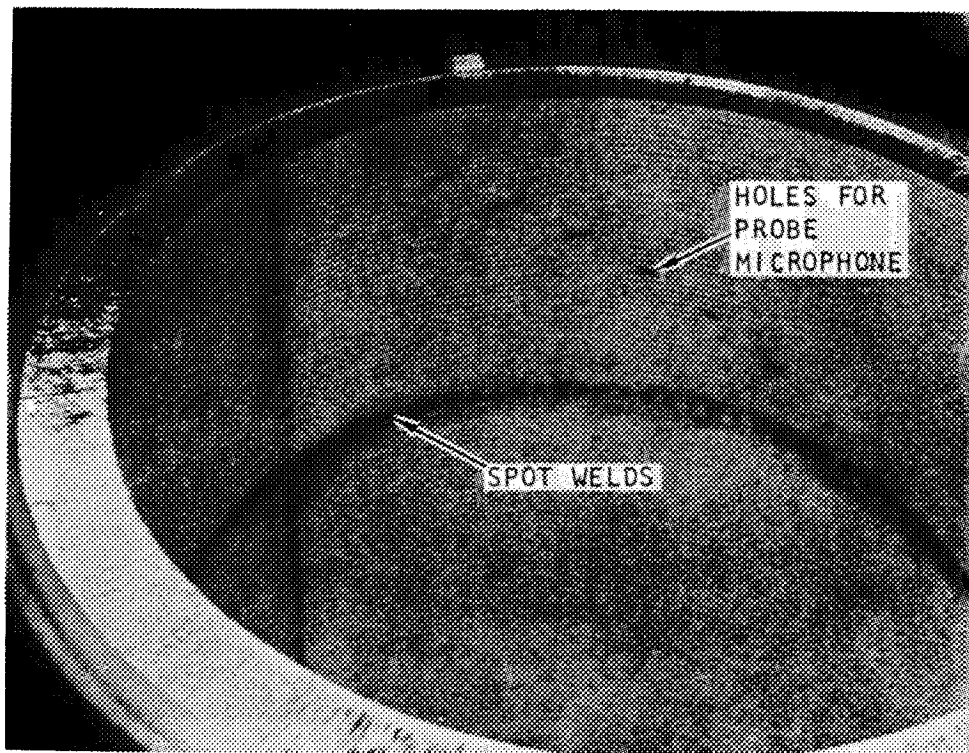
Welded Fibrous Metal Outer Liner
